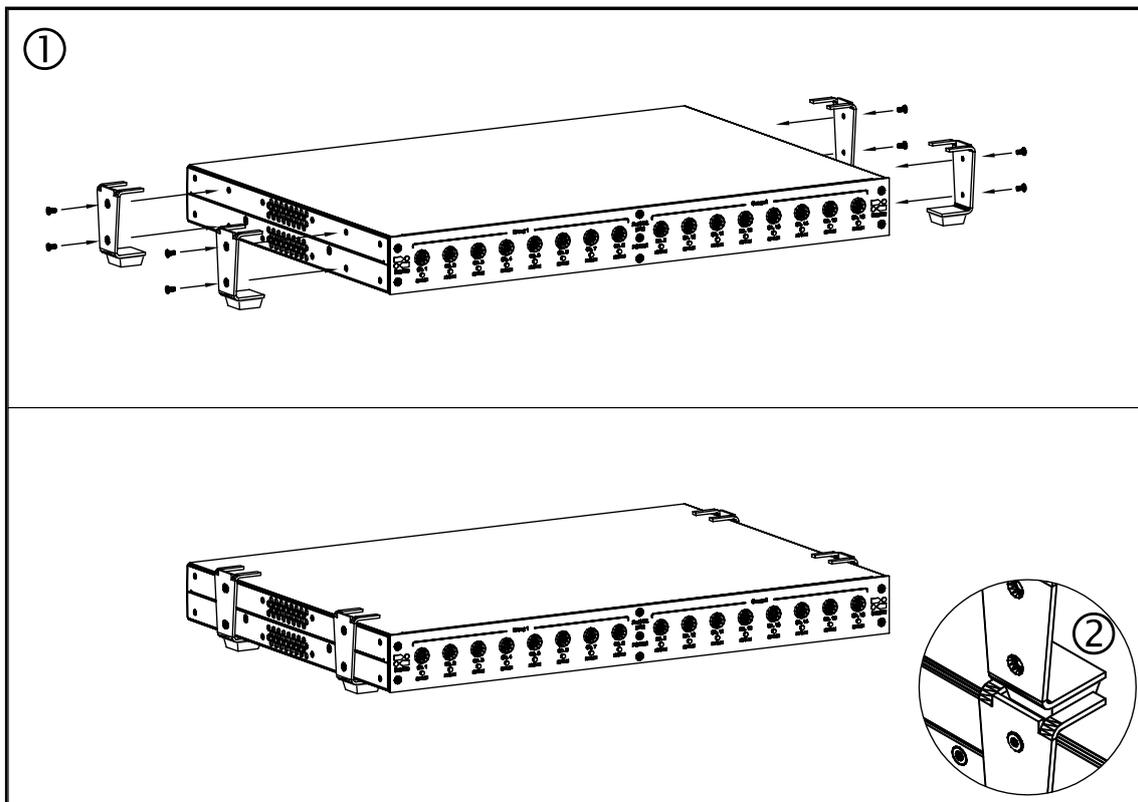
Attaching the ProDAQ 5726 Stackable Desktop Feet Set
